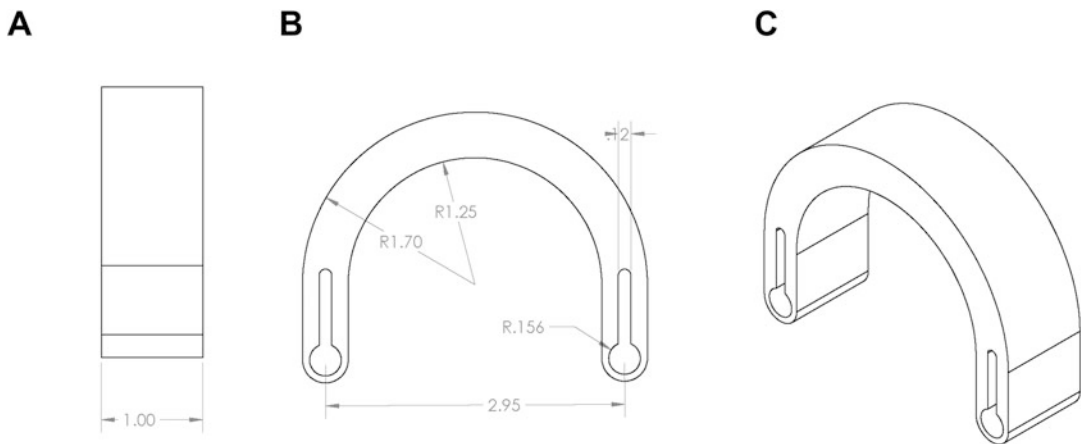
C-arm dimensions (in inches). (a) Side view. (b) Top view. (c) 3/4 view
